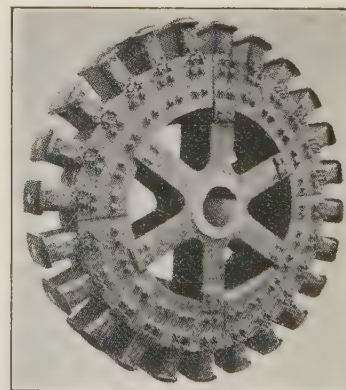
ROTOR OF A LARGE WATERWHEEL-DRIVEN ALTERNATOR OF RECENT DESIGN USING STEEL PLATE CONSTRUCTION
